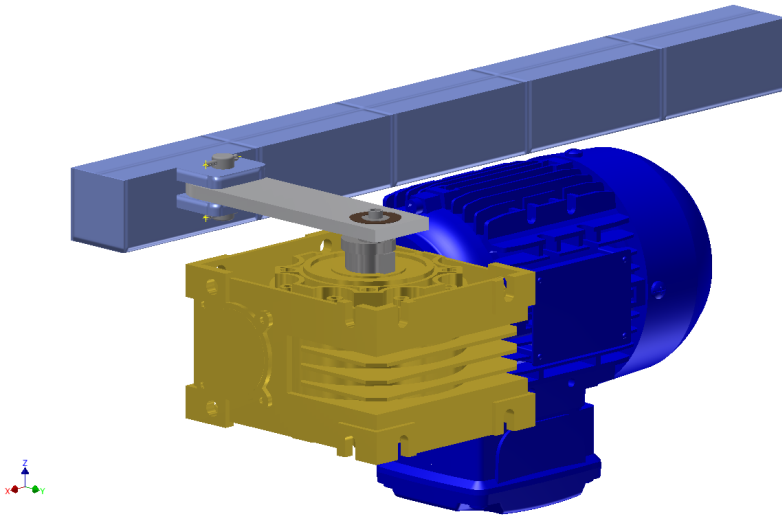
3D sketch of guide vane motor with gear box, excentric shaft, crank arm and parts of the guide vane adjustment arm. (Motor modified from doxsyde at grabcad.com [29]).
